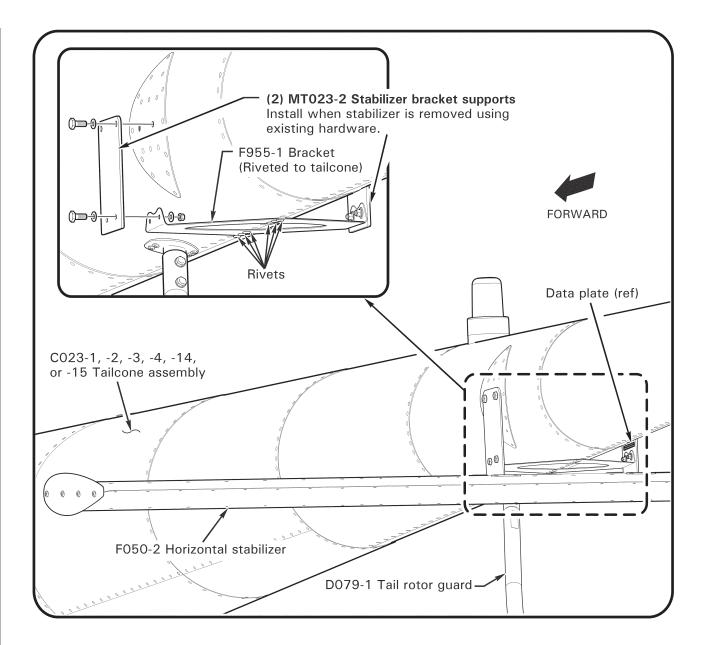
F050-2 HORIZONTAL STABILIZER ASSEMBLY
